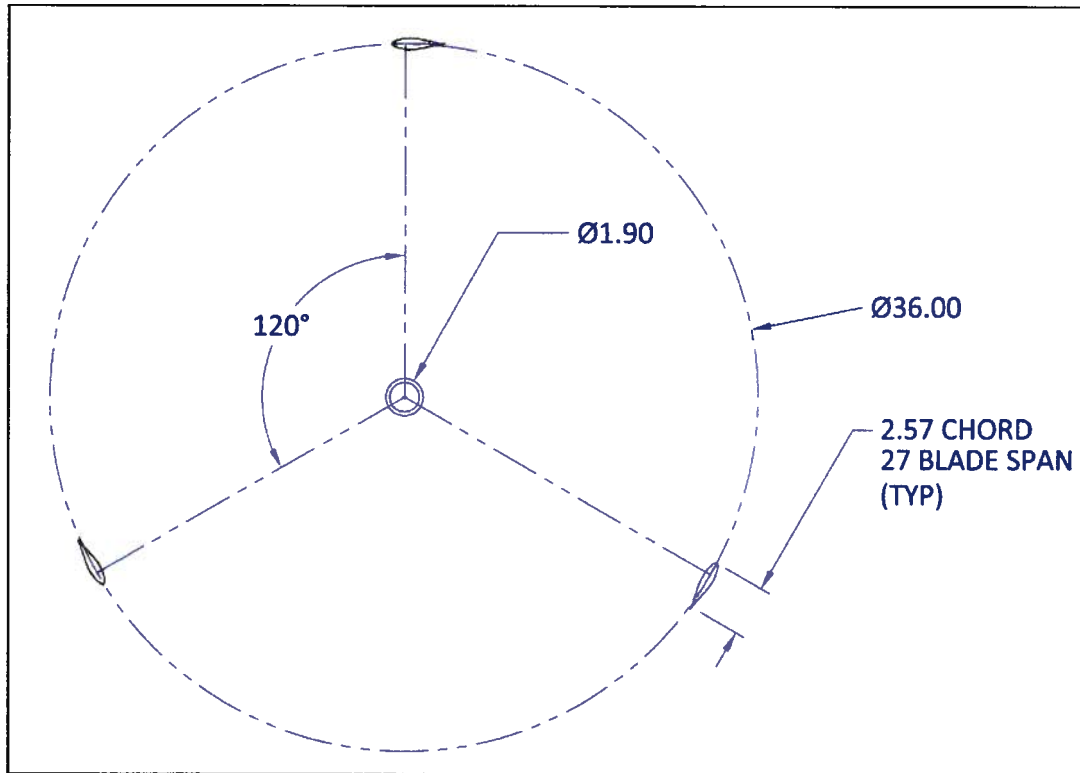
Turbine rotor nomenclature (top view, inches).
